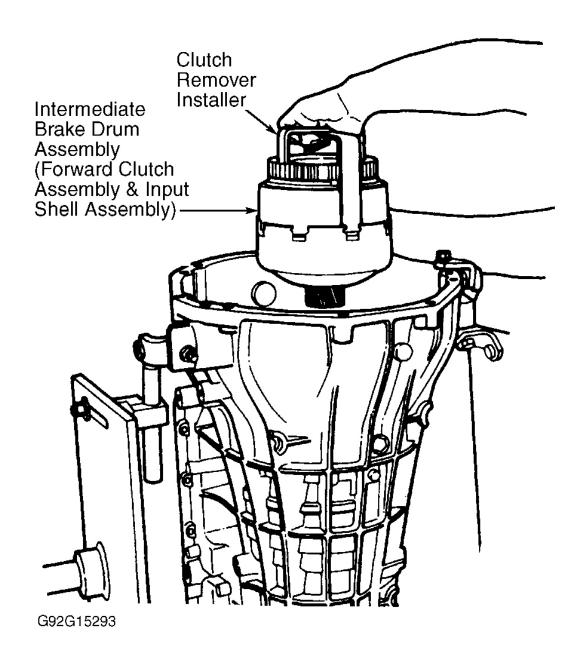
Installing Input Shell Courtesy of FORD MOTOR CO.
